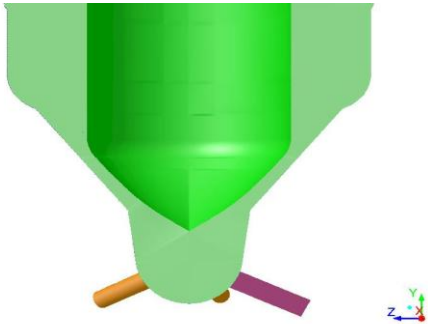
A zoomed-in view of the half model geometry of Design 1 showing the fuel injector needle at its maximum axial lift position.
